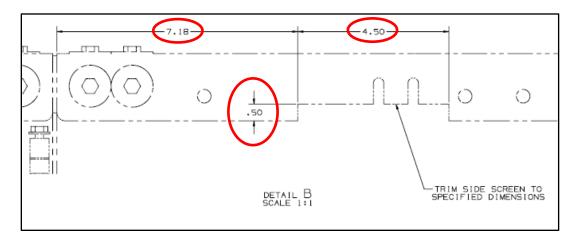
Carefully trim a 4.5" x 0.5" section out of the edge of the panel
